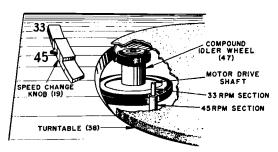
Compound Idler Wheel and Motor Drive Shaft.
